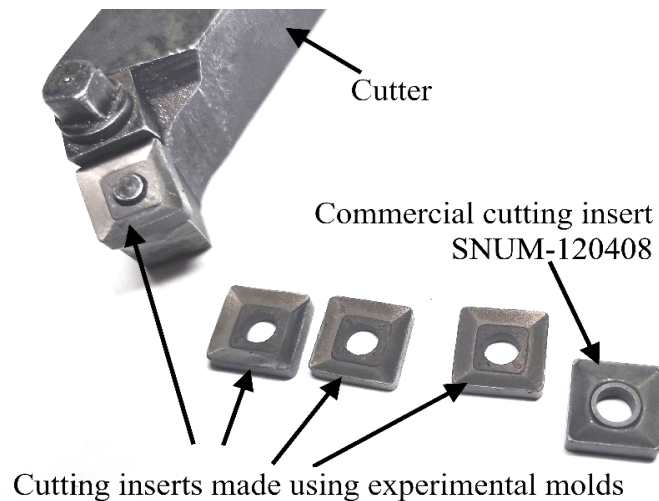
Cutting inserts manufactured using experimental dies and a commercial counterpart
